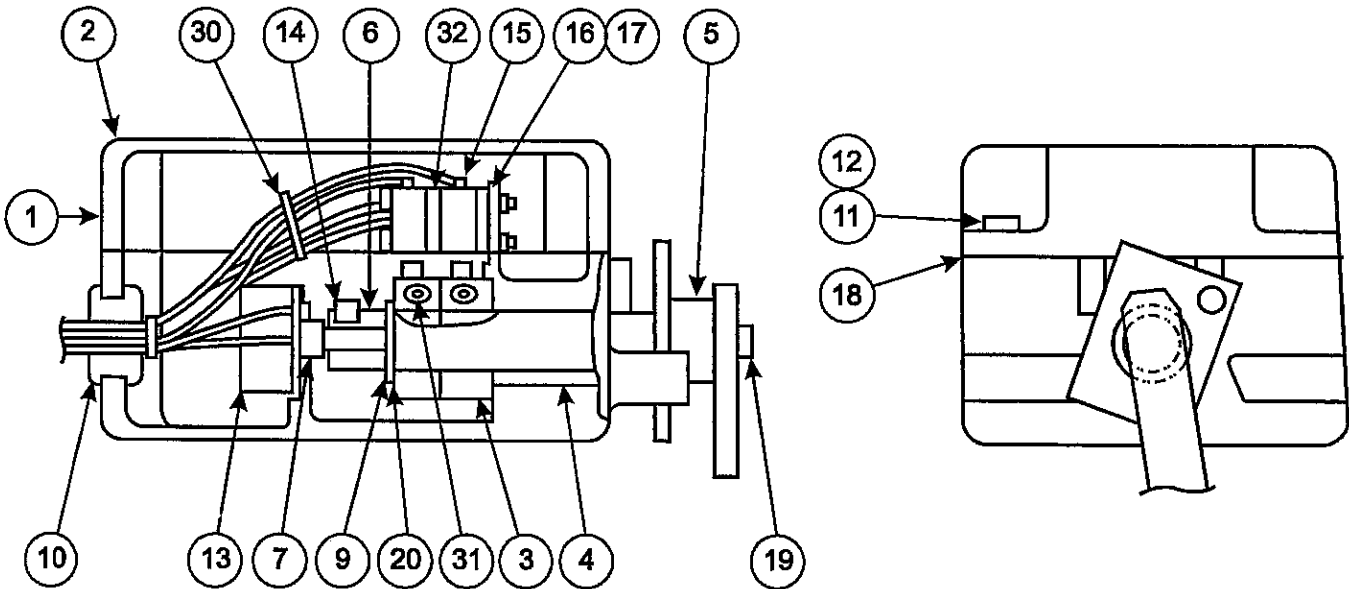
Steering Wheel and Horn Assembly, p/n: 50656-A
